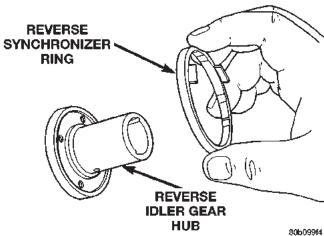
Remove Reverse Idler Gear Synchronizer Ring
